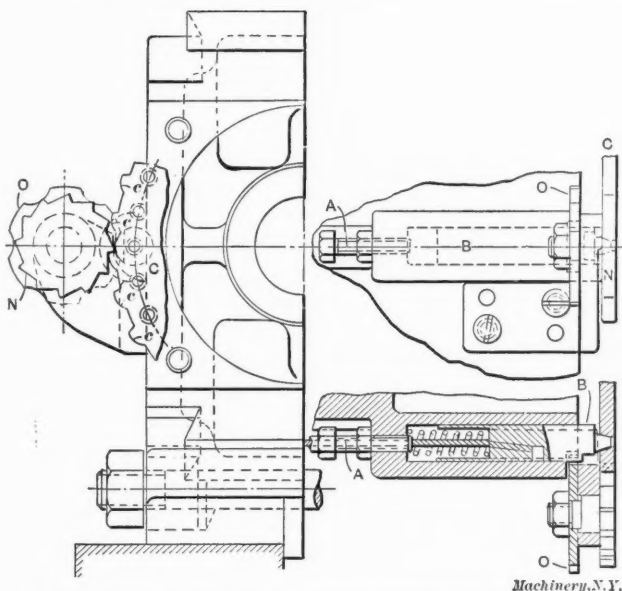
Detail showing the Locking Mechanism and Plates which control its Movement
